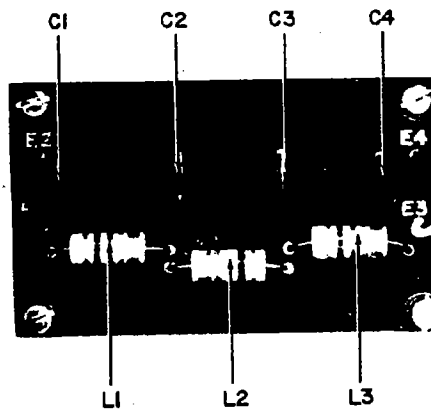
Part 14898 Low Pass Filter Printed Circuit Assembly (A19A1A1), Component Locations
